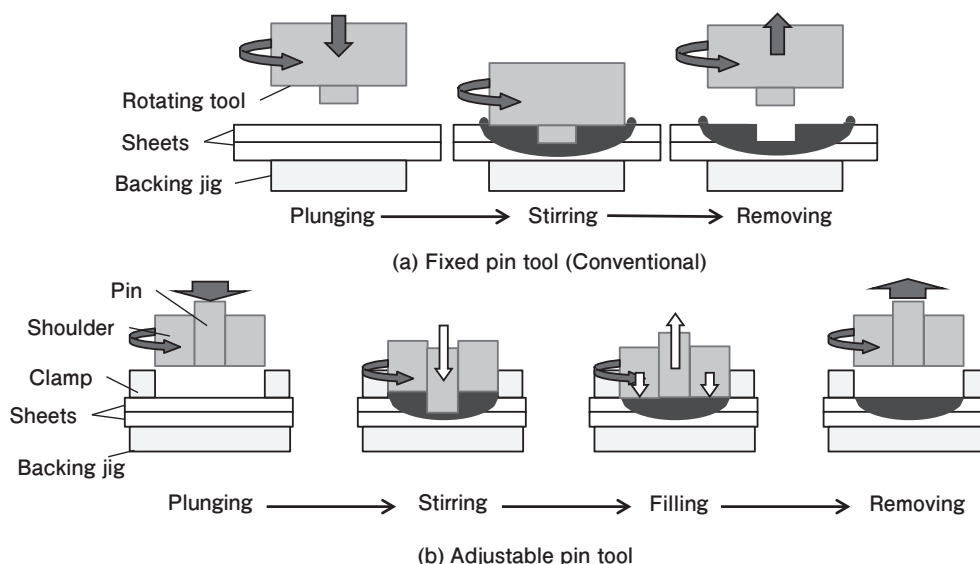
Welding method illustration of conventional (a) and adjustable (b) FSSW¹²⁾.
